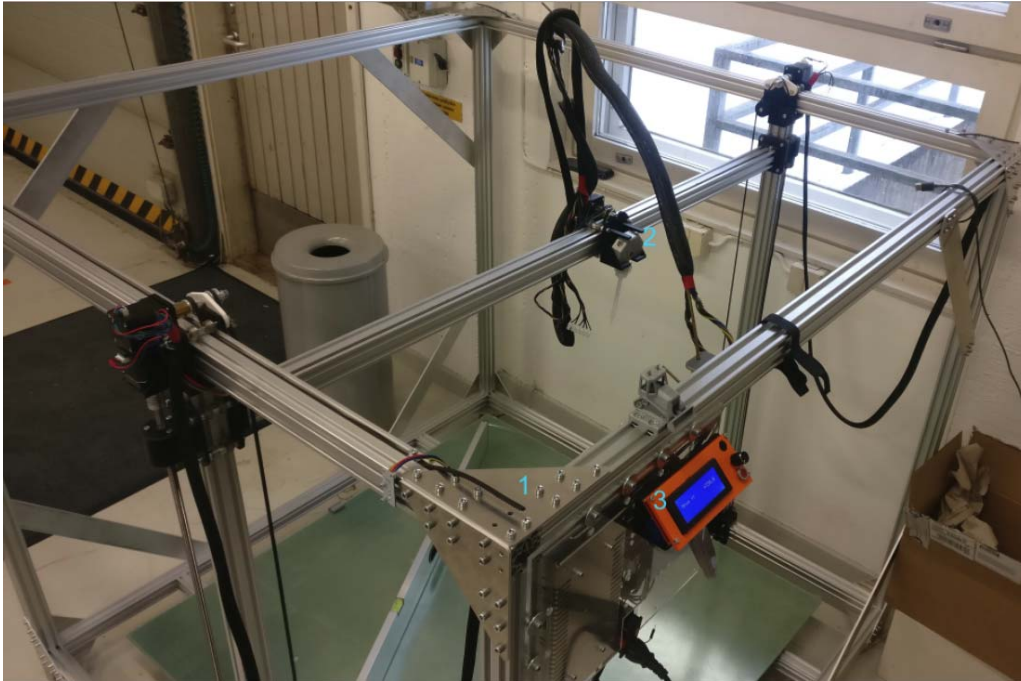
Picture of printer setup (will be better in the future, with more parts!!) 1. Printer frame, 2. Mixer-head, 3. Control unit
